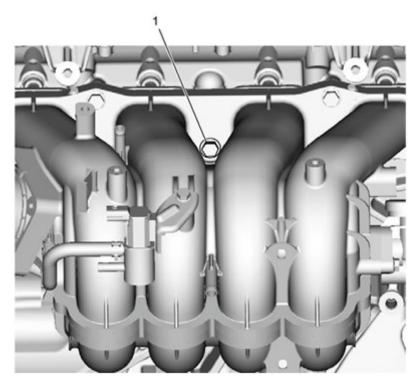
Identifying Intake Manifold Bolt No. 1 Courtesy of SUZUKI OF AMERICA CORP.
